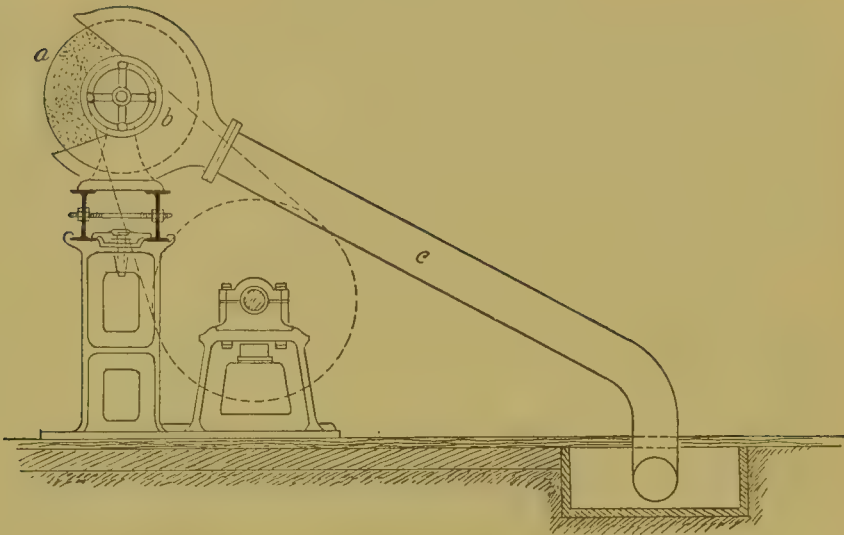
Apparatus for removing dust in manufacturing establishments:
